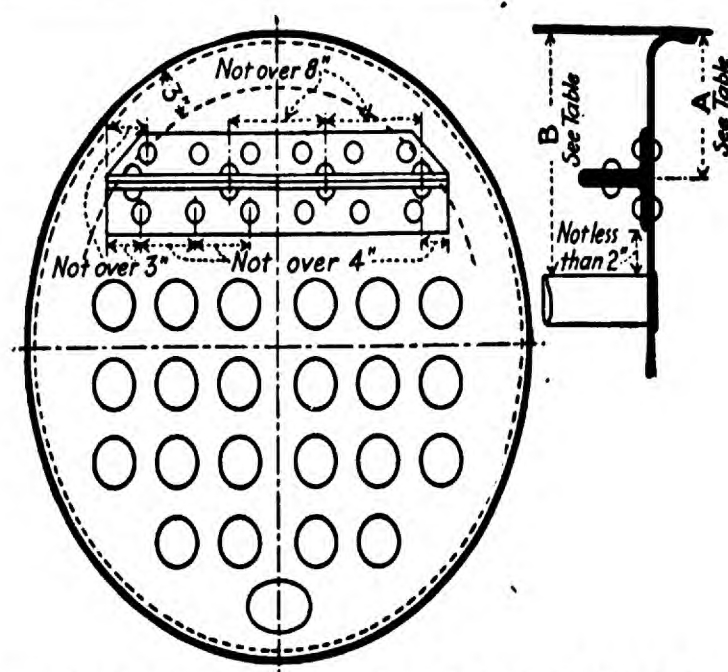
Staying of Head with Steel Angles in Tubular Boiler.
